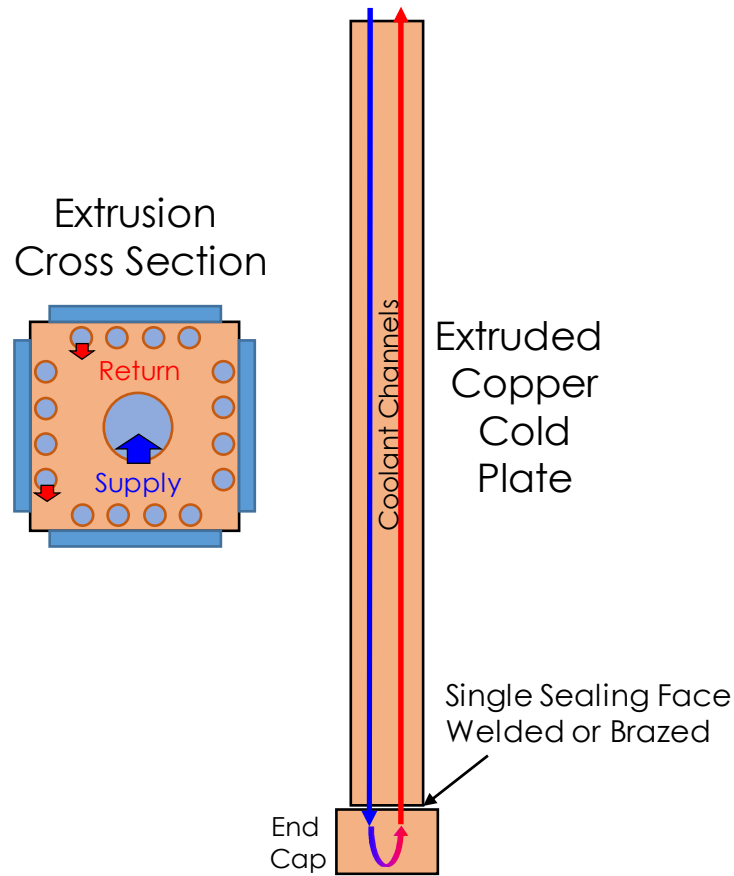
Axial flow configuration with a 2D cross section extruded cold plate core and flow reversing cap
